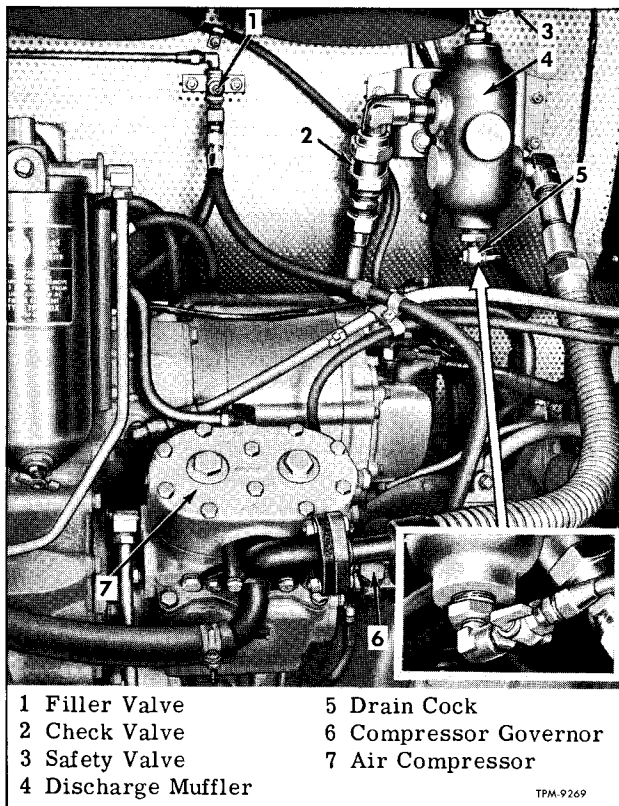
Bendix-Westinghouse Air Compressor and Discharge Muffler Installed
